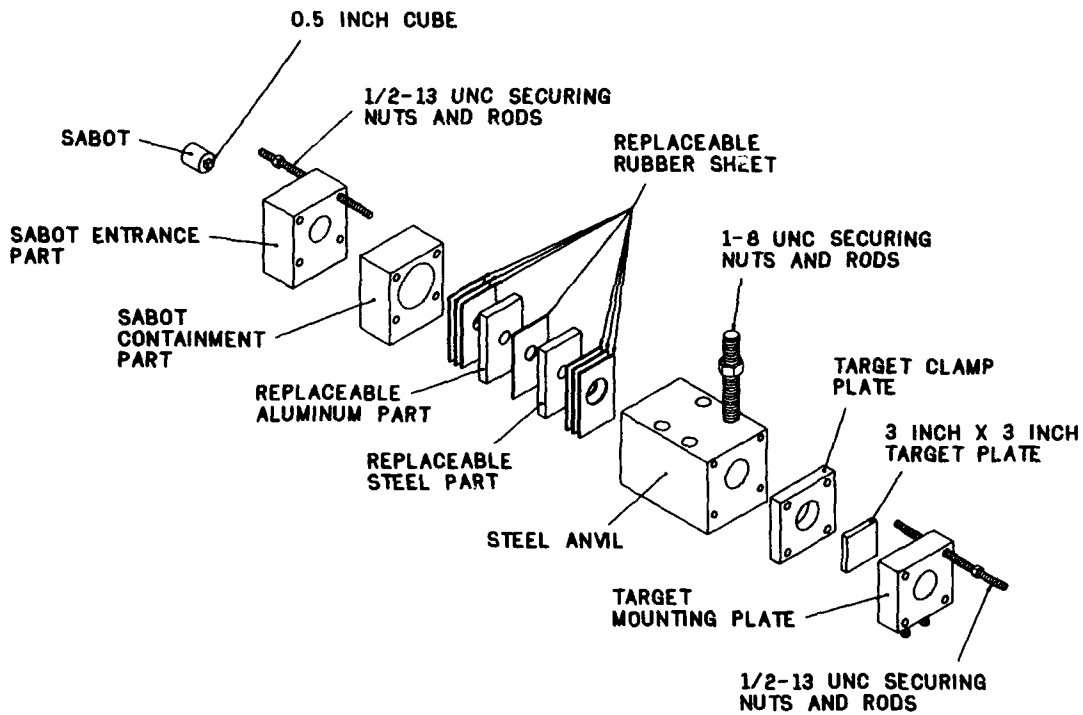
SCHEMATIC OF SABOT STRIPPER WITH ATTACHABLE SMALL TARGET ASSEMBLY
